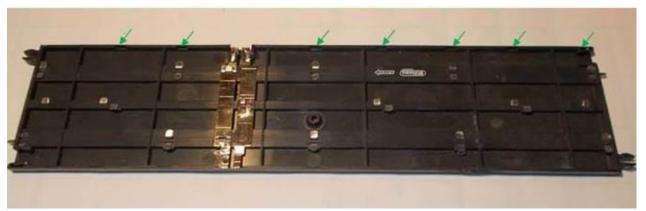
The underside of a 10-inch straight road section shows features common to most 'Streets road pieces. Reinforcing ribs can be seen, as can a circular reinforcement ring around the hold-down screw mounting hole. Metal tabs from the topside pass through the plastic to hold the rails firmly every two inches or so. Two metal connector plates run across the piece and will fit to the connector wire sets on either side. Small cutouts are provided so wires can be run underneath the sides (green arrows).
